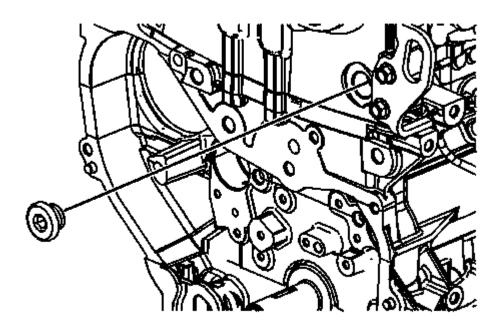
Timing Chain Retention Tool On Intake Side Courtesy of GENERAL MOTORS COMPANY
